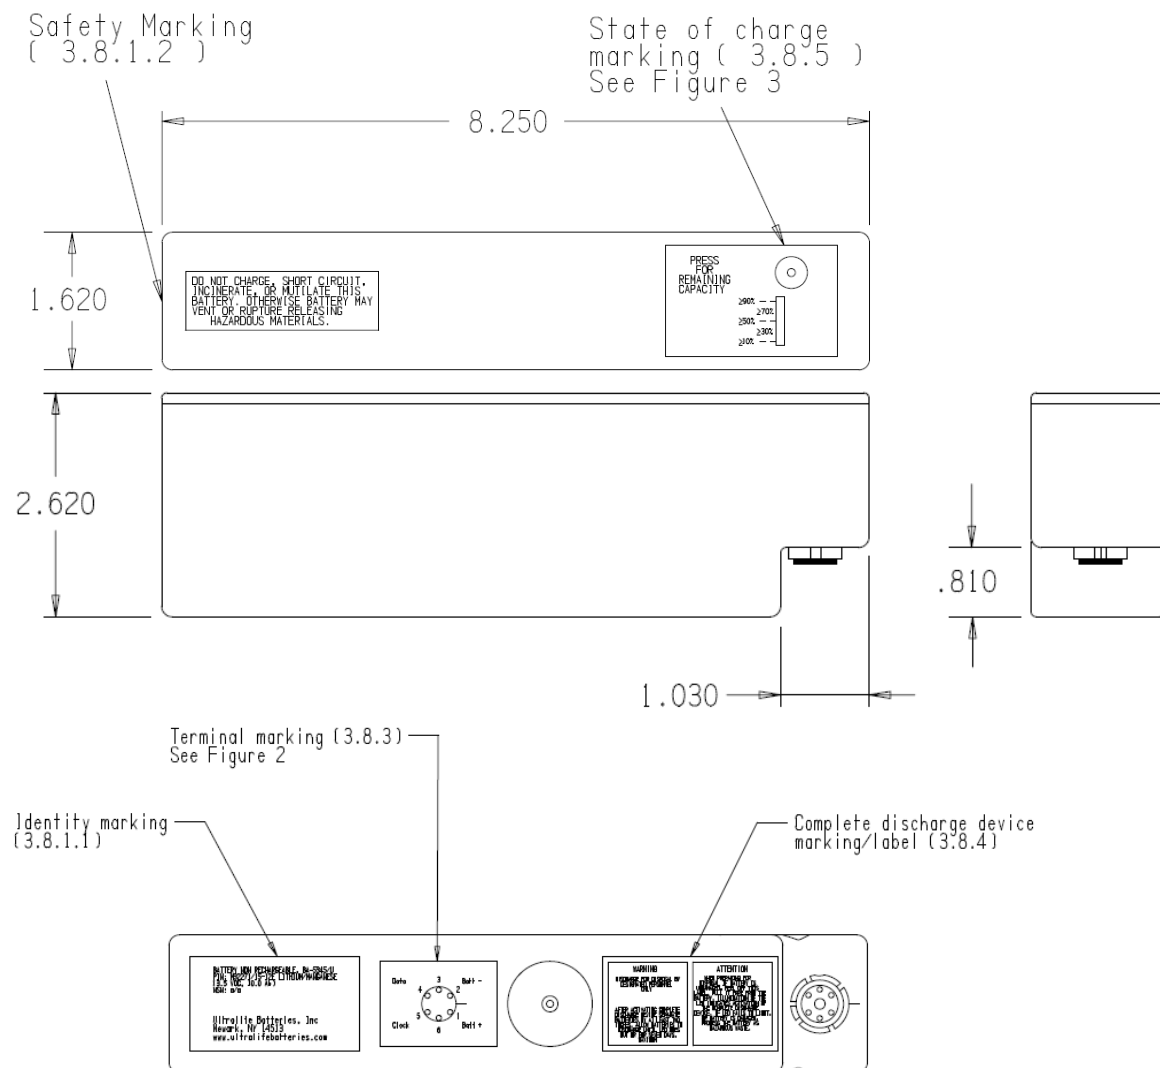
M32271/15-12E Dimensions and marking locations
